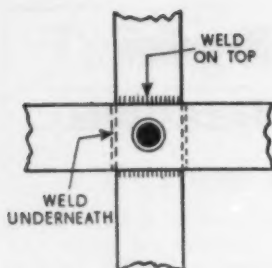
(left)—A.S.T.M. A 385-55T recommends that all contacting surfaces should be completely sealed by welding.
